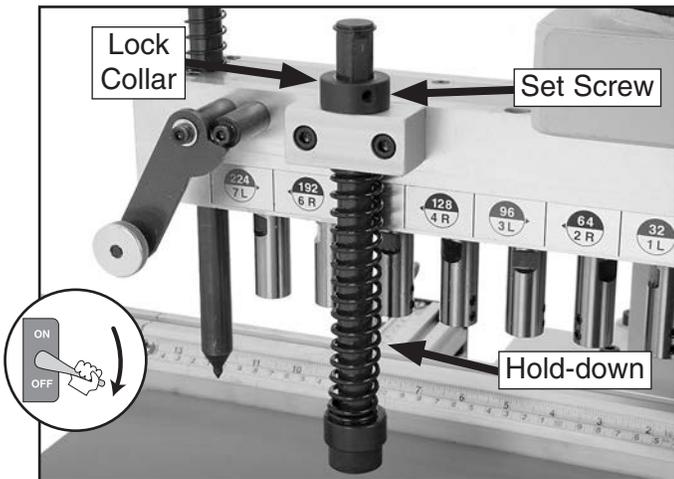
Workpiece hold-down (boring head guard removed for photo clarity).
